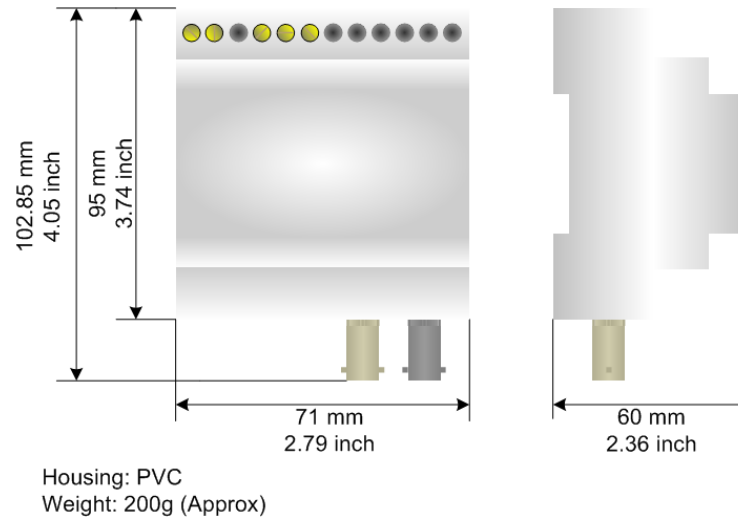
Mechanical dimensions scheme for HD67072-B2, HD67073-B2, HD67074-B2
